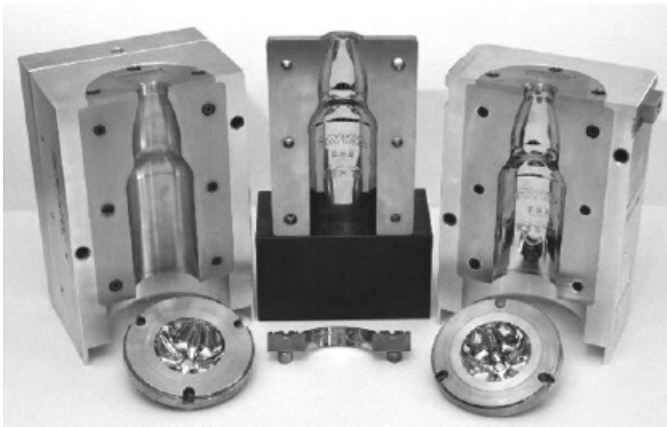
Bottle cavity inserts with independent bottom plugs. (Courtesy of Ryka Blow Molds Ltd., Mississauga, Ontario, Canada.)
